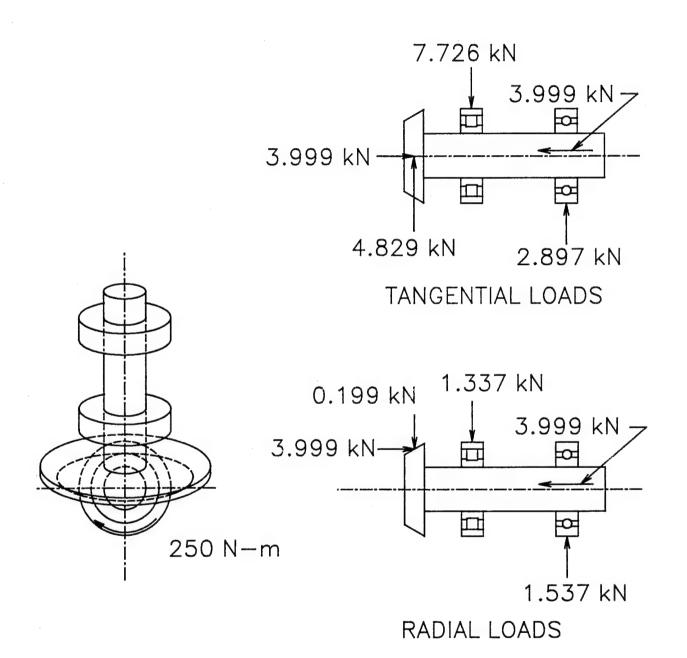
INPUT PINION SHAFT LOADING FOR SPIRAL BEVEL EXAMPLE
